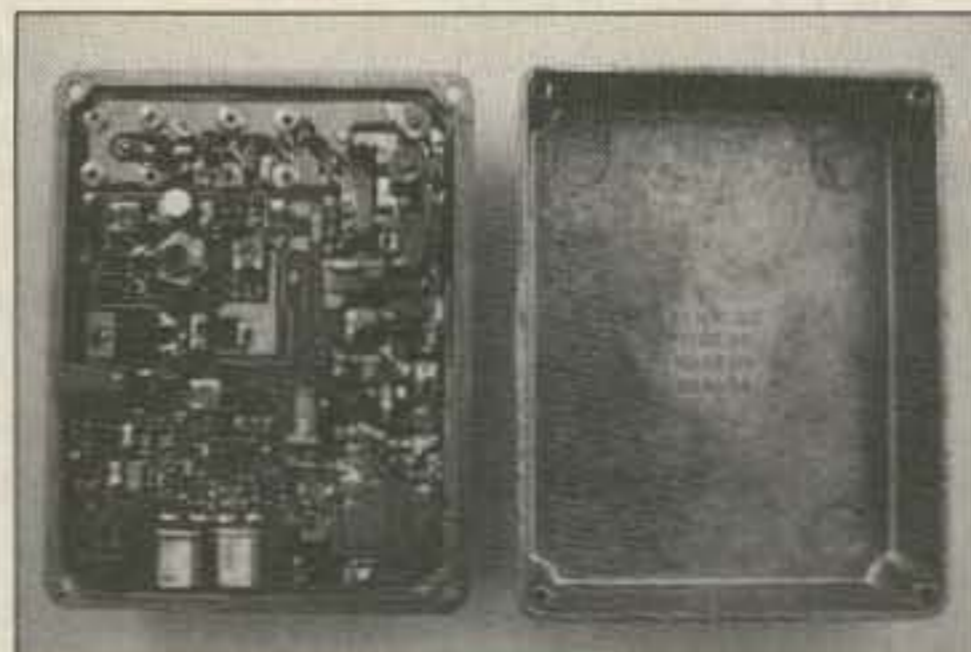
Photo E. The modules use surface mount device construction, with all components in the lid of the housings.
